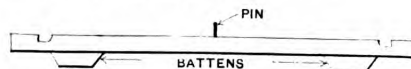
Section of Core Board on Line A B of Previous Figure.
